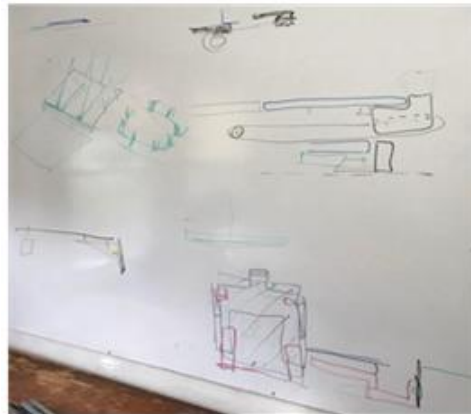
Final assembly drawing of the bed replacer treadmill mechanism with cam
